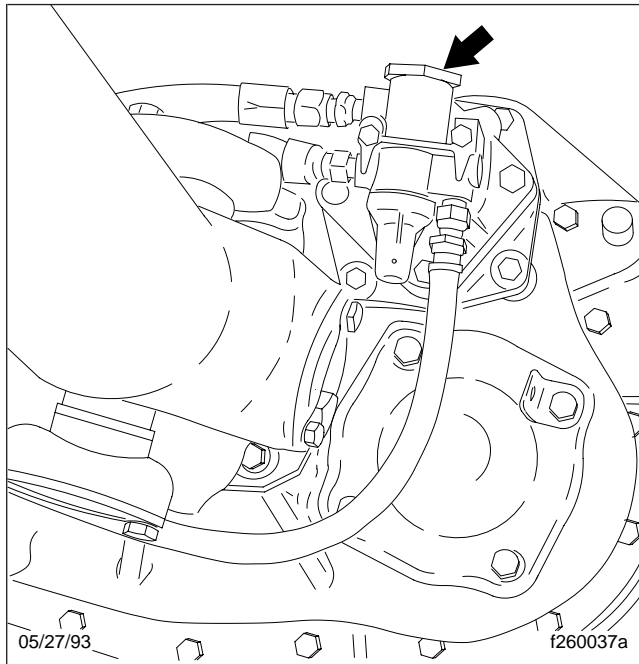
, Air Filter/ Regulator Location (Fuller transmission shown)
